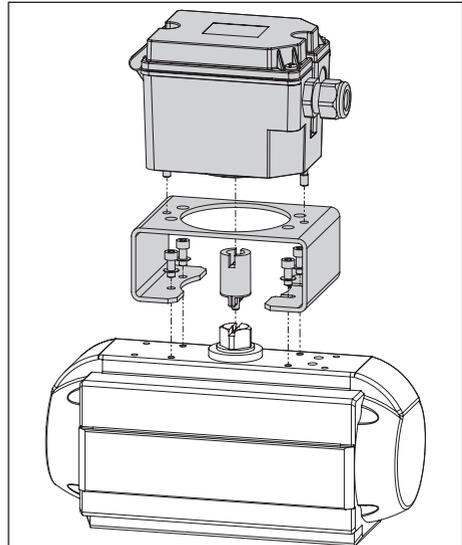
Attachment according to VDI/VDE 3845, level 1
